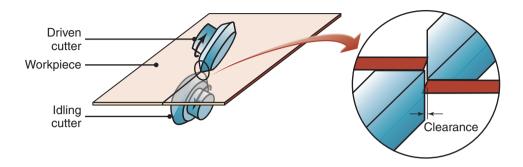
Slitting with rotary knives; this process is similar to opening cans.
